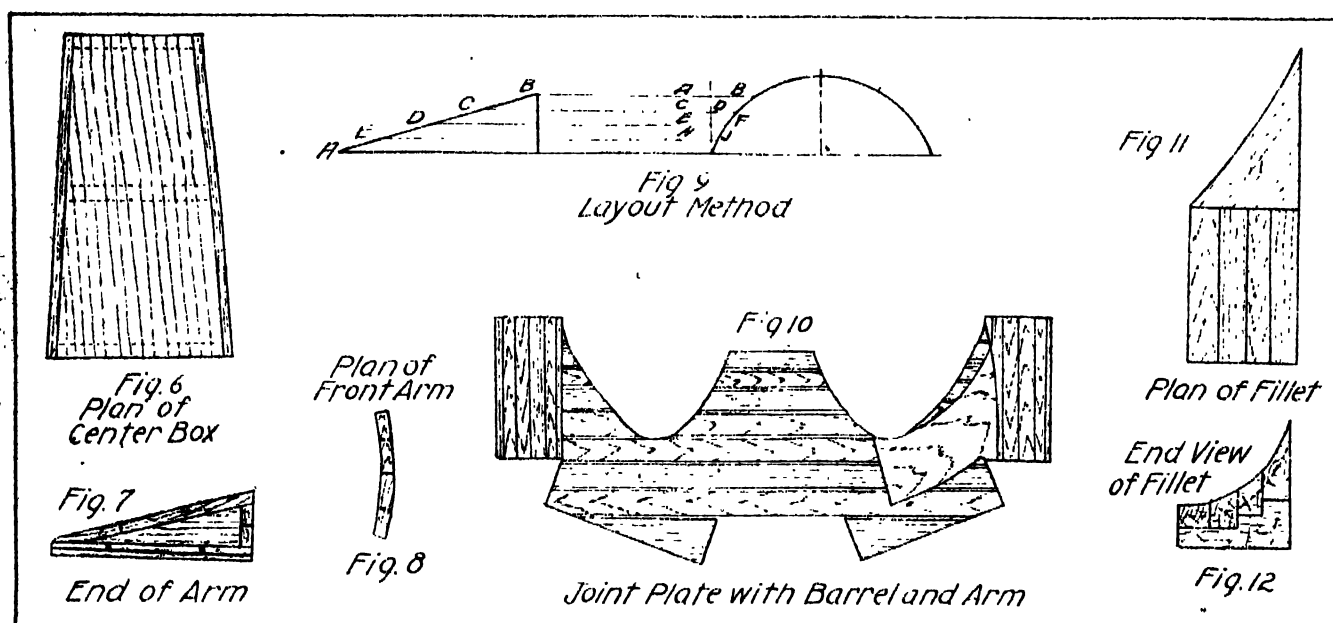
PLAN OF CENTER BOX FIG. 7 END VIEW OF ARM FIG. 8 PLAN OF FRONT OF ARM FIG. 9—METHOD OF LAYING-OUT THE ARMS
